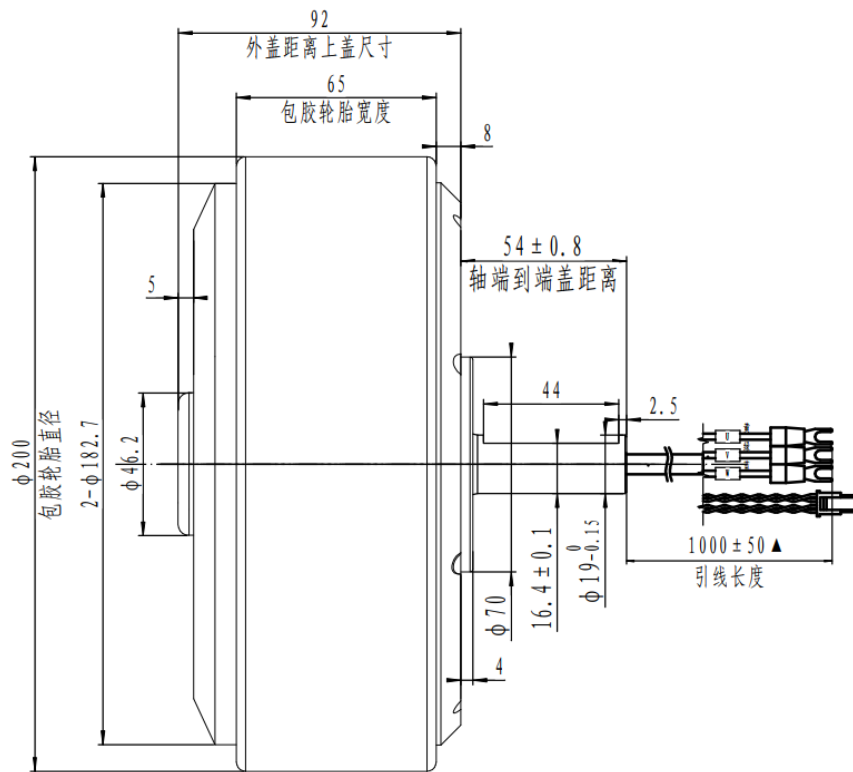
8 inch 30Nm hub motor mounting size
